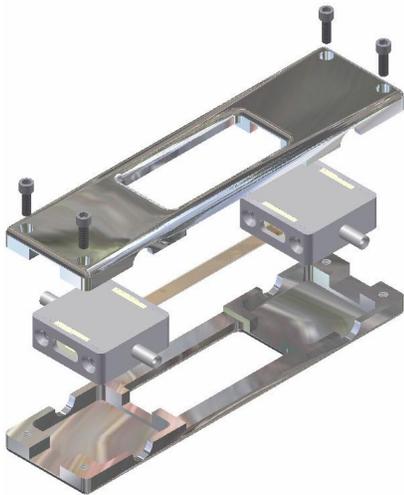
Hollow slide holder. Exploded view of components showing fluid reservoirs “headers” at each end of the hollow slide and embedded into stabilizing holder. Each header has an inlet and an outlet.
